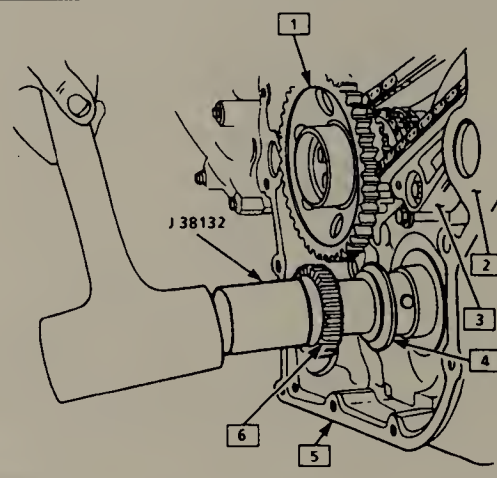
Timing chain assembly—5.7L (VIN J) engine
